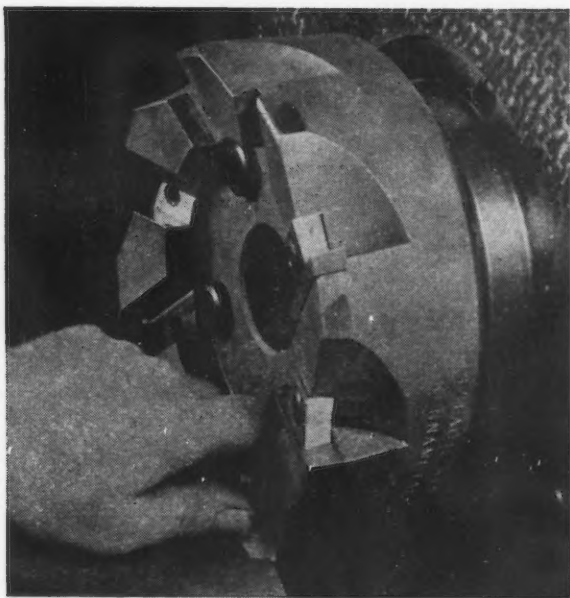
The remaining blades are inserted and set to the shoulder of the fly cut after the workpiece has been retracted slightly to avoid contact with the face.
